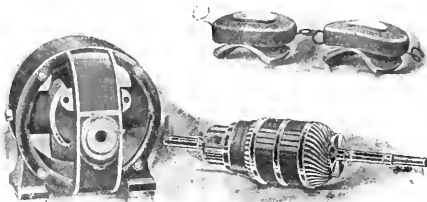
ELEMENTAL PARTS OF MOTOR.
